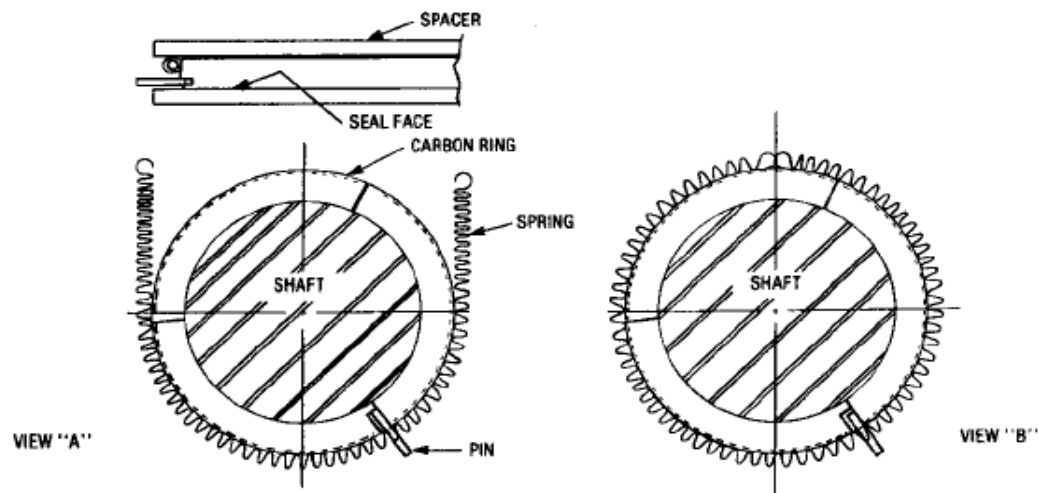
Carbon Ring Assembly, Condensing Turbine
